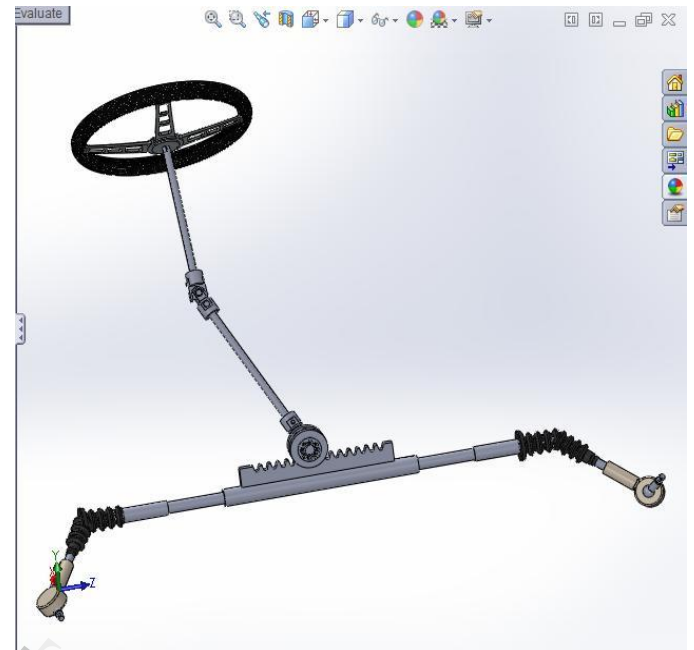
Entire steering assembly, with roller pinion as the driving gear instead of the typical helical gear pinion.
